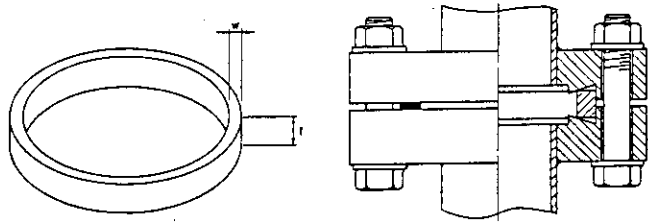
A novel copper gasket (left) and the cross section of the gasket held between two flanges(right).
